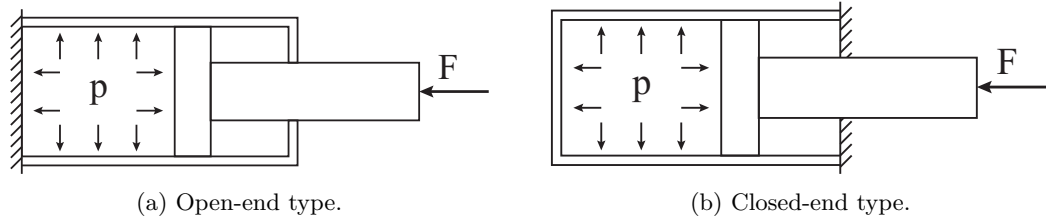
Illustrations of typical cylinder mounting, which will result in open- and closed-end cylinder design. [7]
